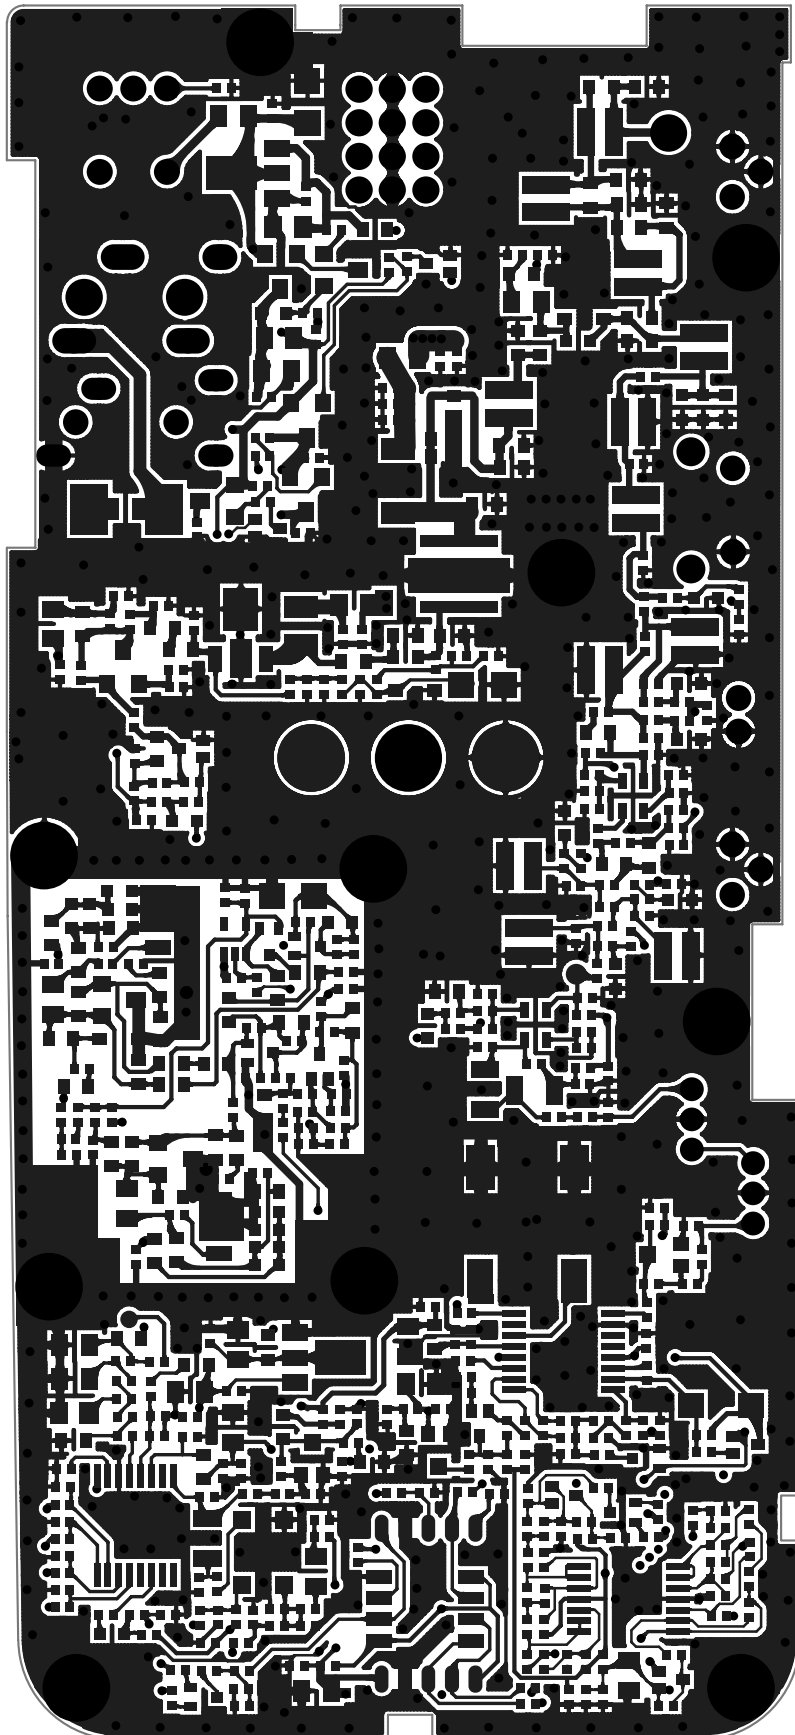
PT4208 Main Board Bottom Layer Layout (420-470MHz)
